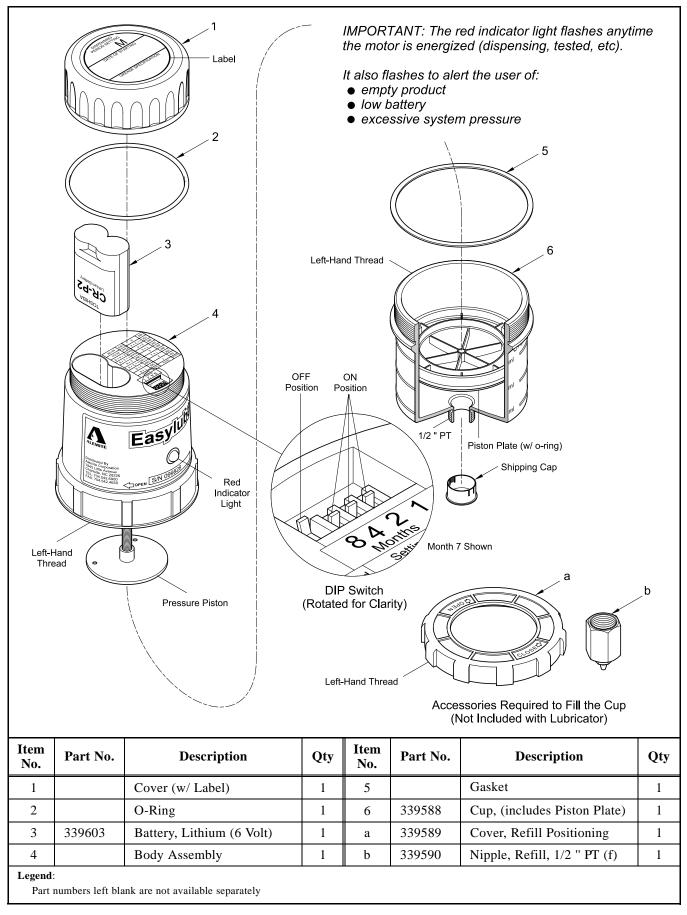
Easylube Lubricator Model 1746-151 - Exploded View
